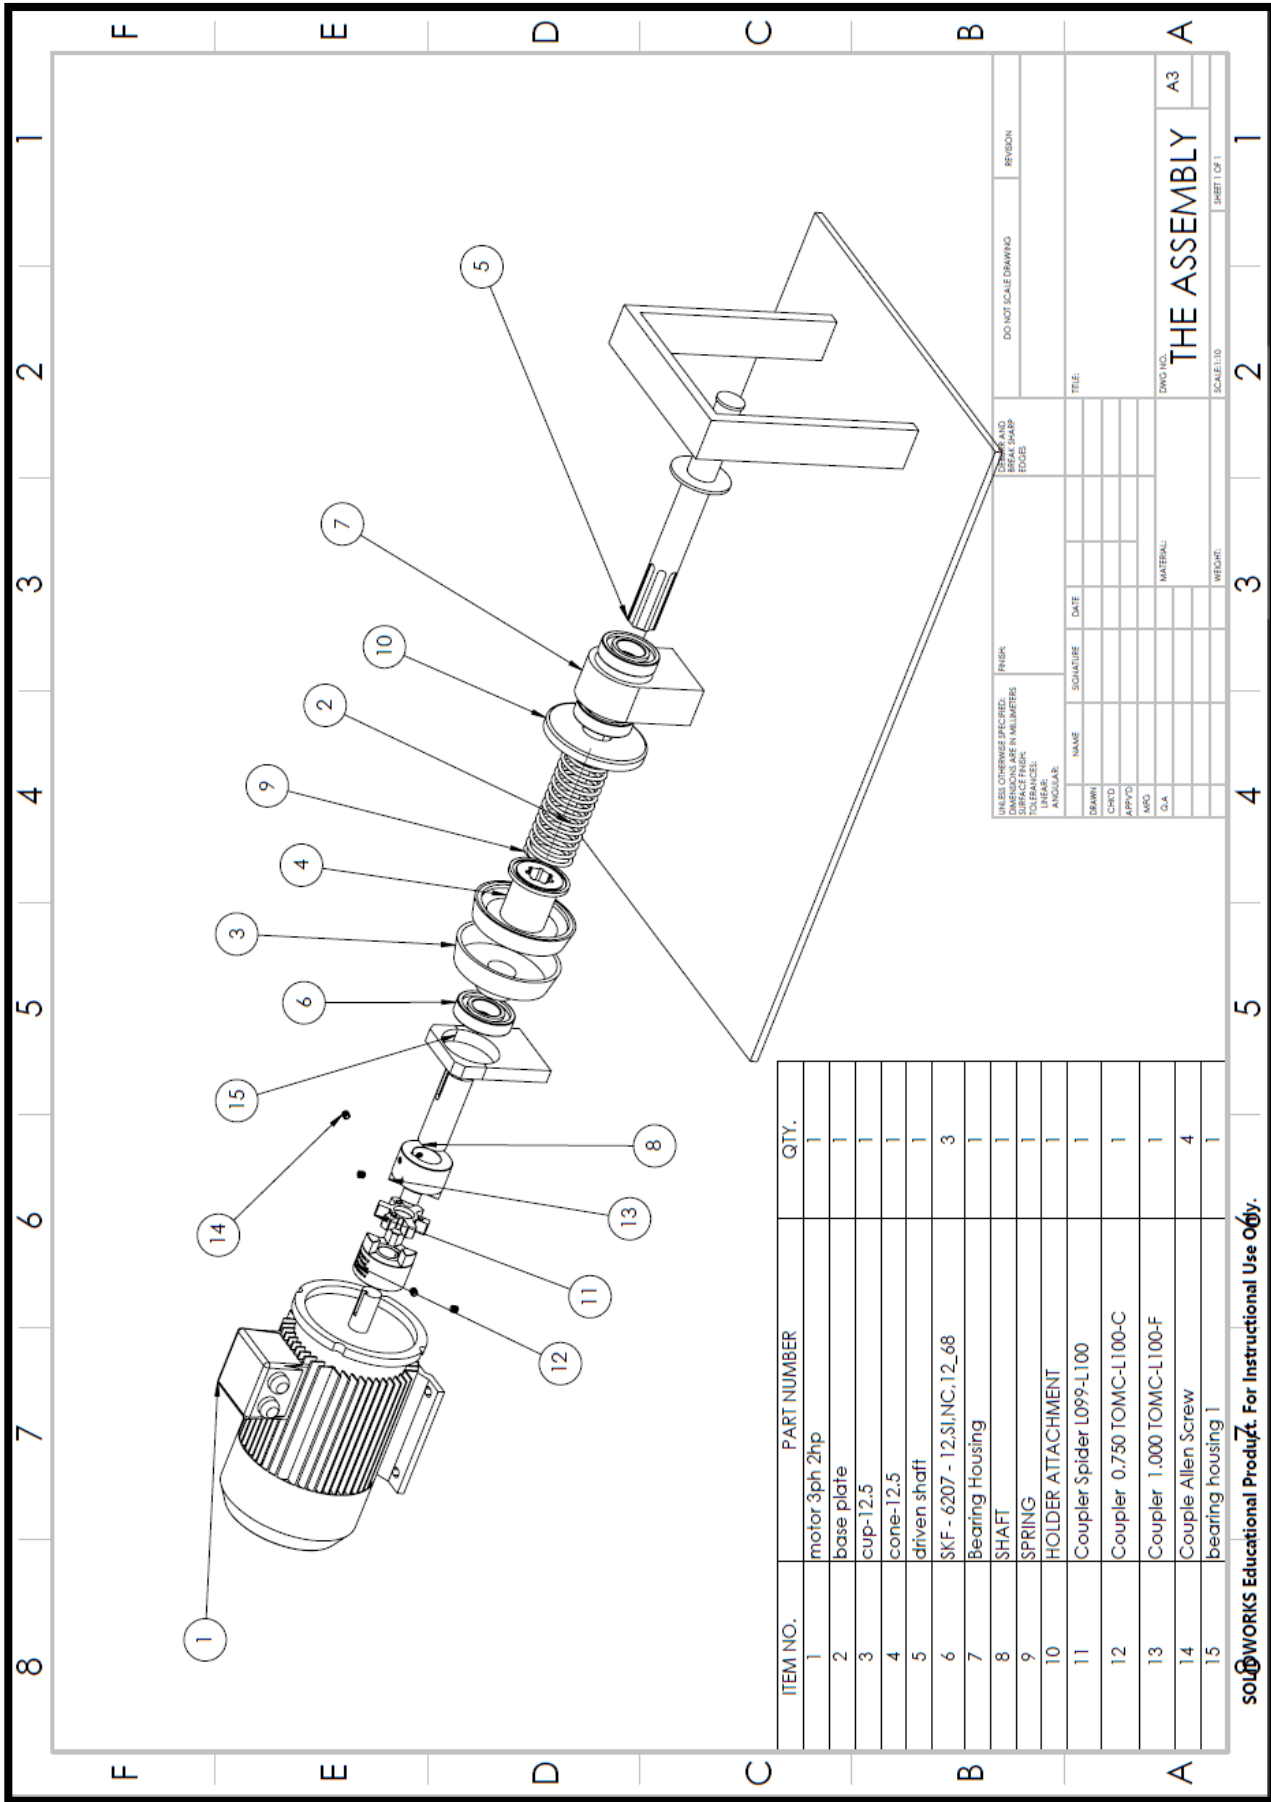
(h): Exploded View of Prototype w/ BOM
